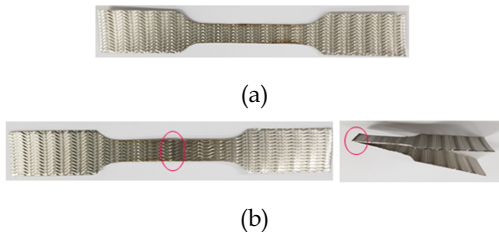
The shape of general plate specimen (base metal, a) and actual specimen (welded, b) for test mode 1.
